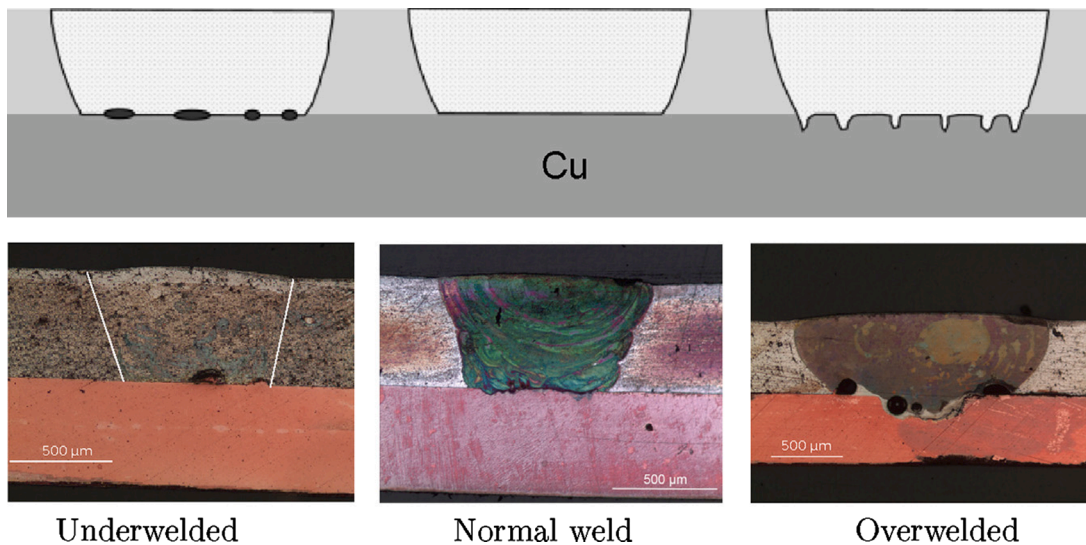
Three different weld seam structures corresponding with welding conditions [101].
